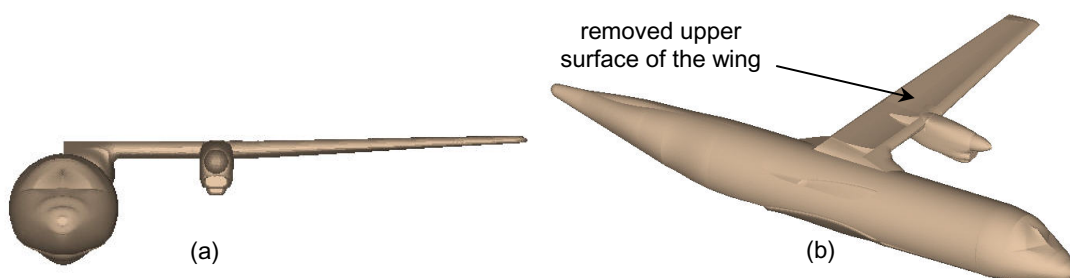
CAD model showing the removed parts. (a) front view and (b) panoramic view.
